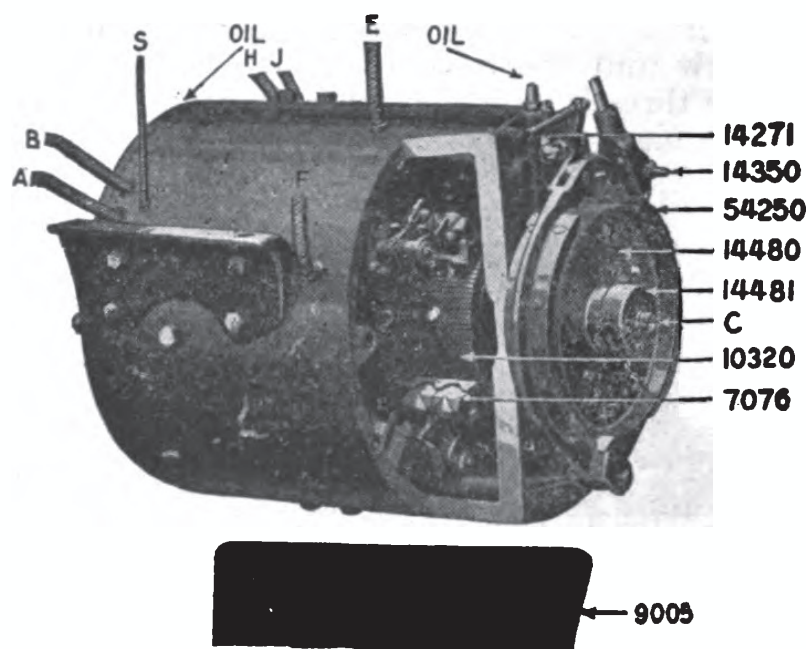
,067.—Rauch and Lang electric vehicle motor. *Instructions for care of motor:* The two oil covers lead to the ball bearings in the motor yokes. A good grade of light cylinder oil is recommended for these bearings. The commutator, 10,320, should be at all times kept clean, free from any gummy or gritty substance. The carbon brushes 7,076 should make perfect contact with the surface of the commutator and should be replaced with new ones when worn out. These brushes are originally $1\frac{5}{8}$ inches long and should be replaced with new ones as soon as the measurement is reduced to $1\frac{1}{4}$ inches. It is safer to replace these brushes often, rather than allow them to become too short. Very serious damage may result from using brushes that are too short or ones that make poor contact with the commutator. Brushes that are too short or that are making poor contact will pit, burn and blacken the surface of the commutator. Replacement of brushes should be made only by an experienced person. The motor leads are lead out of motor through insulated holes. These holes, lettered J, H, B, A, S, E and F correspond to the letter contacts on the controller into which they are connected. The motor brake may be adjusted for wear by means of the winged nut 14,350. Clearance between brake jaws and wheel may be adjusted by means of the screw 14,271. To remove brake wheel from armature shaft, take the $\frac{1}{8}$ inch, 12 pitch bolt, 3 inches or longer, or a cap screw may then be screwed through the threads in the cap and up against the end of the armature shaft. Continue to turn this screw and the pulley will be drawn off the shaft.
